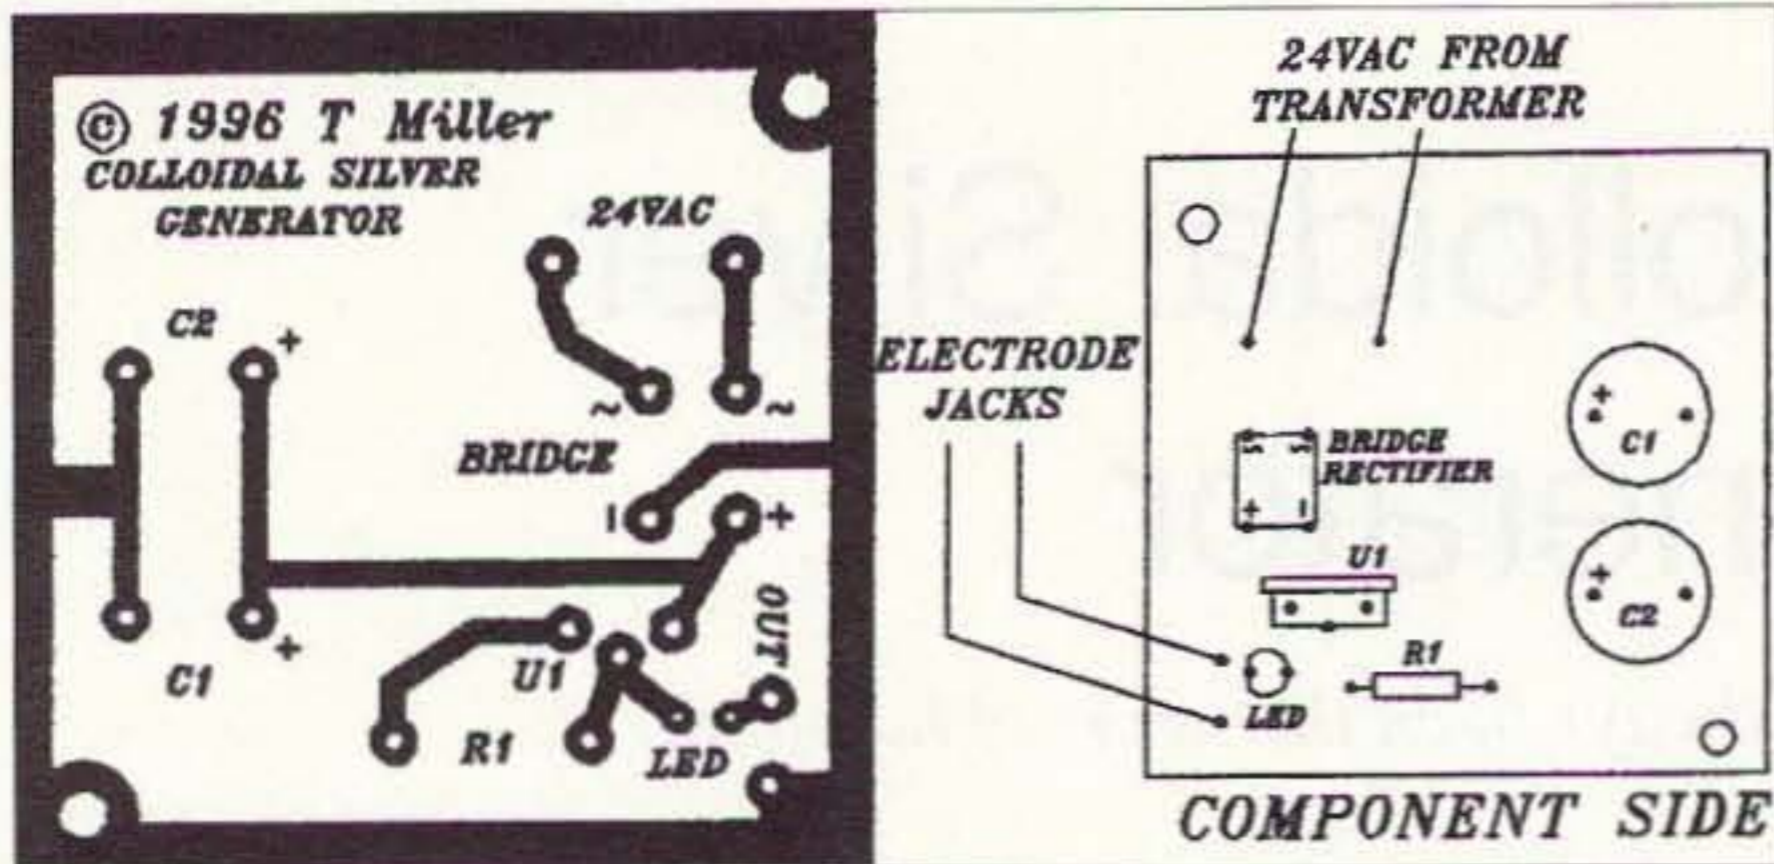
Printed circuit board pattern (foil side) and component layout. Boards are available from FAR Circuits.
